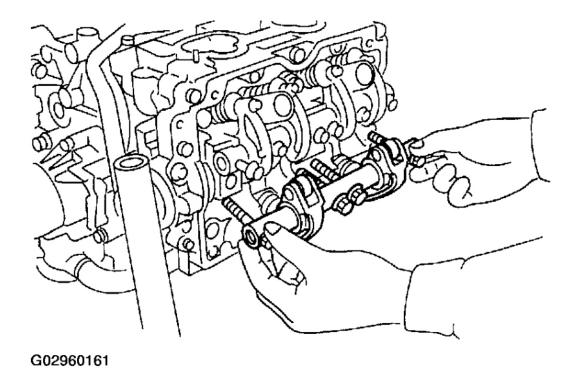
Removing Valve Rocker Assembly Courtesy of SUBARU OF AMERICA, INC.
